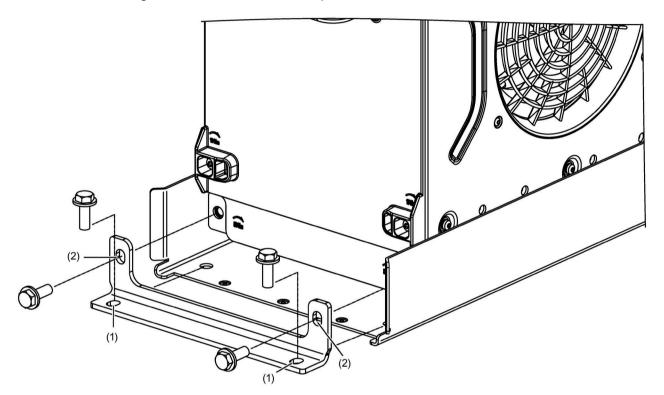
Attaching the mounting bracket (diagram showing an example)
